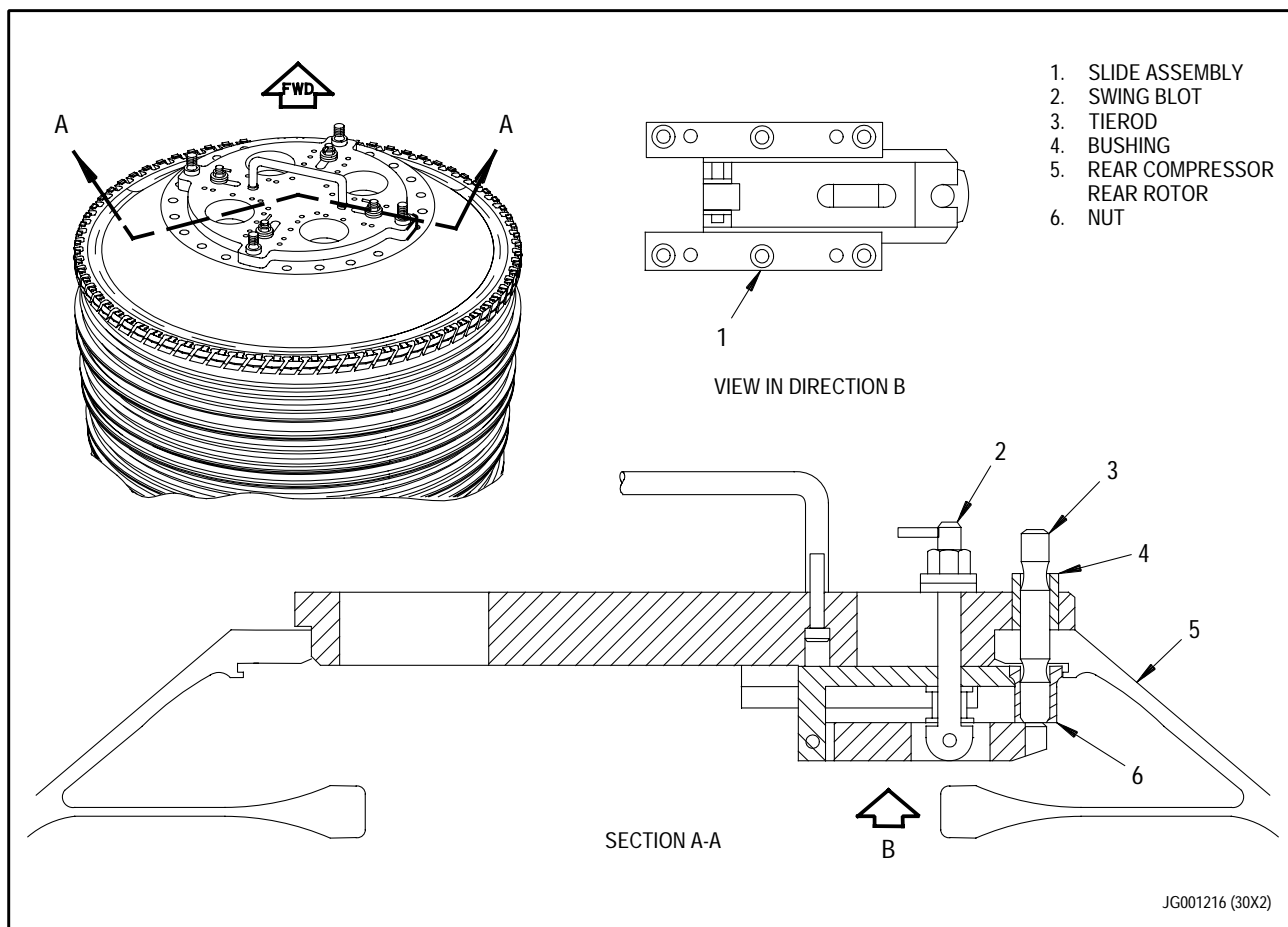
Removal of Tierods Using PWA 57537 Torque Fixture
